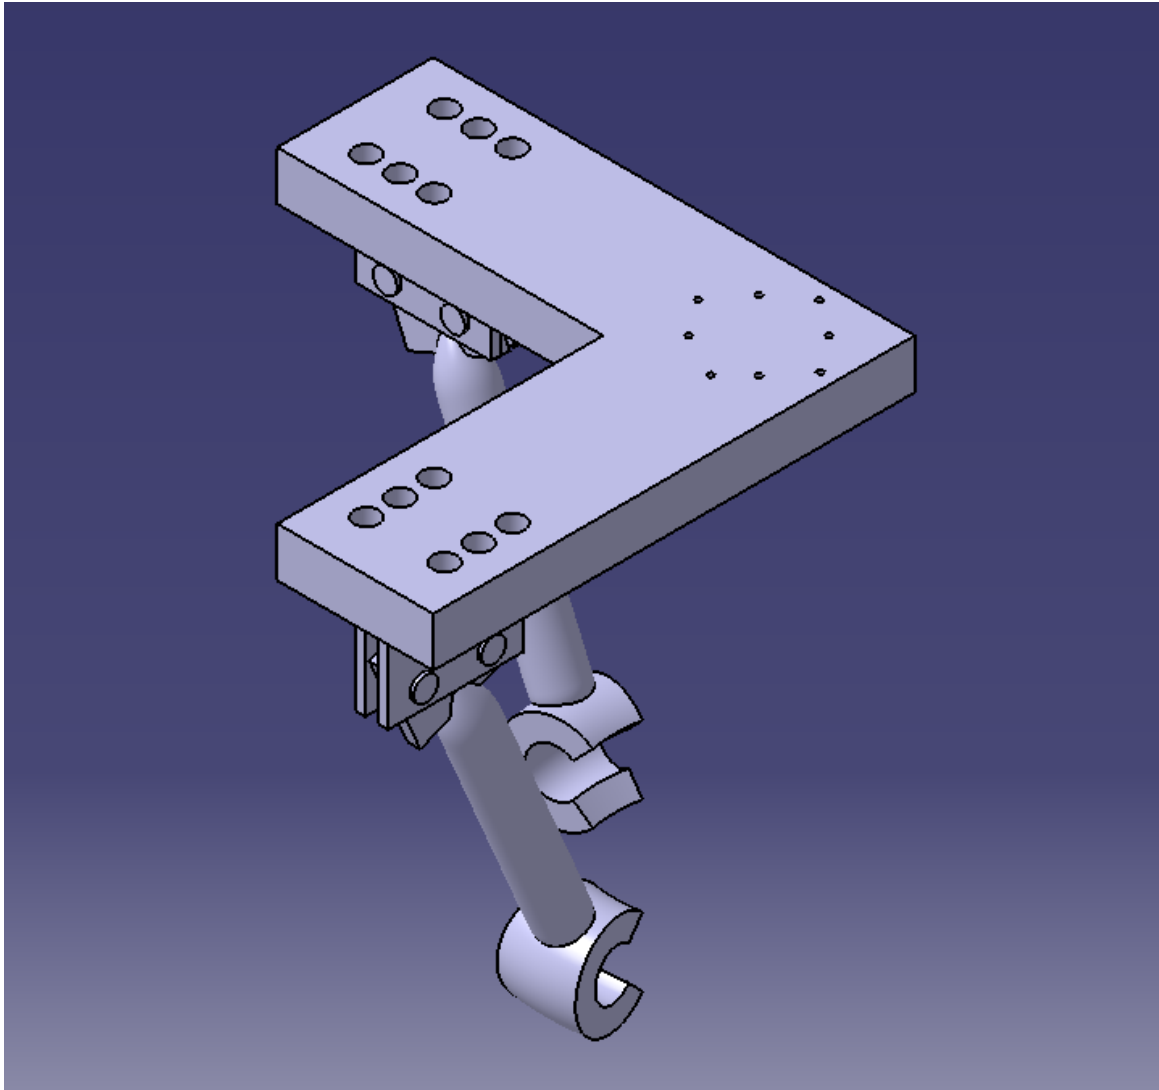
Revised Thrust Frame Adapter with 2 Arms CAD Model
